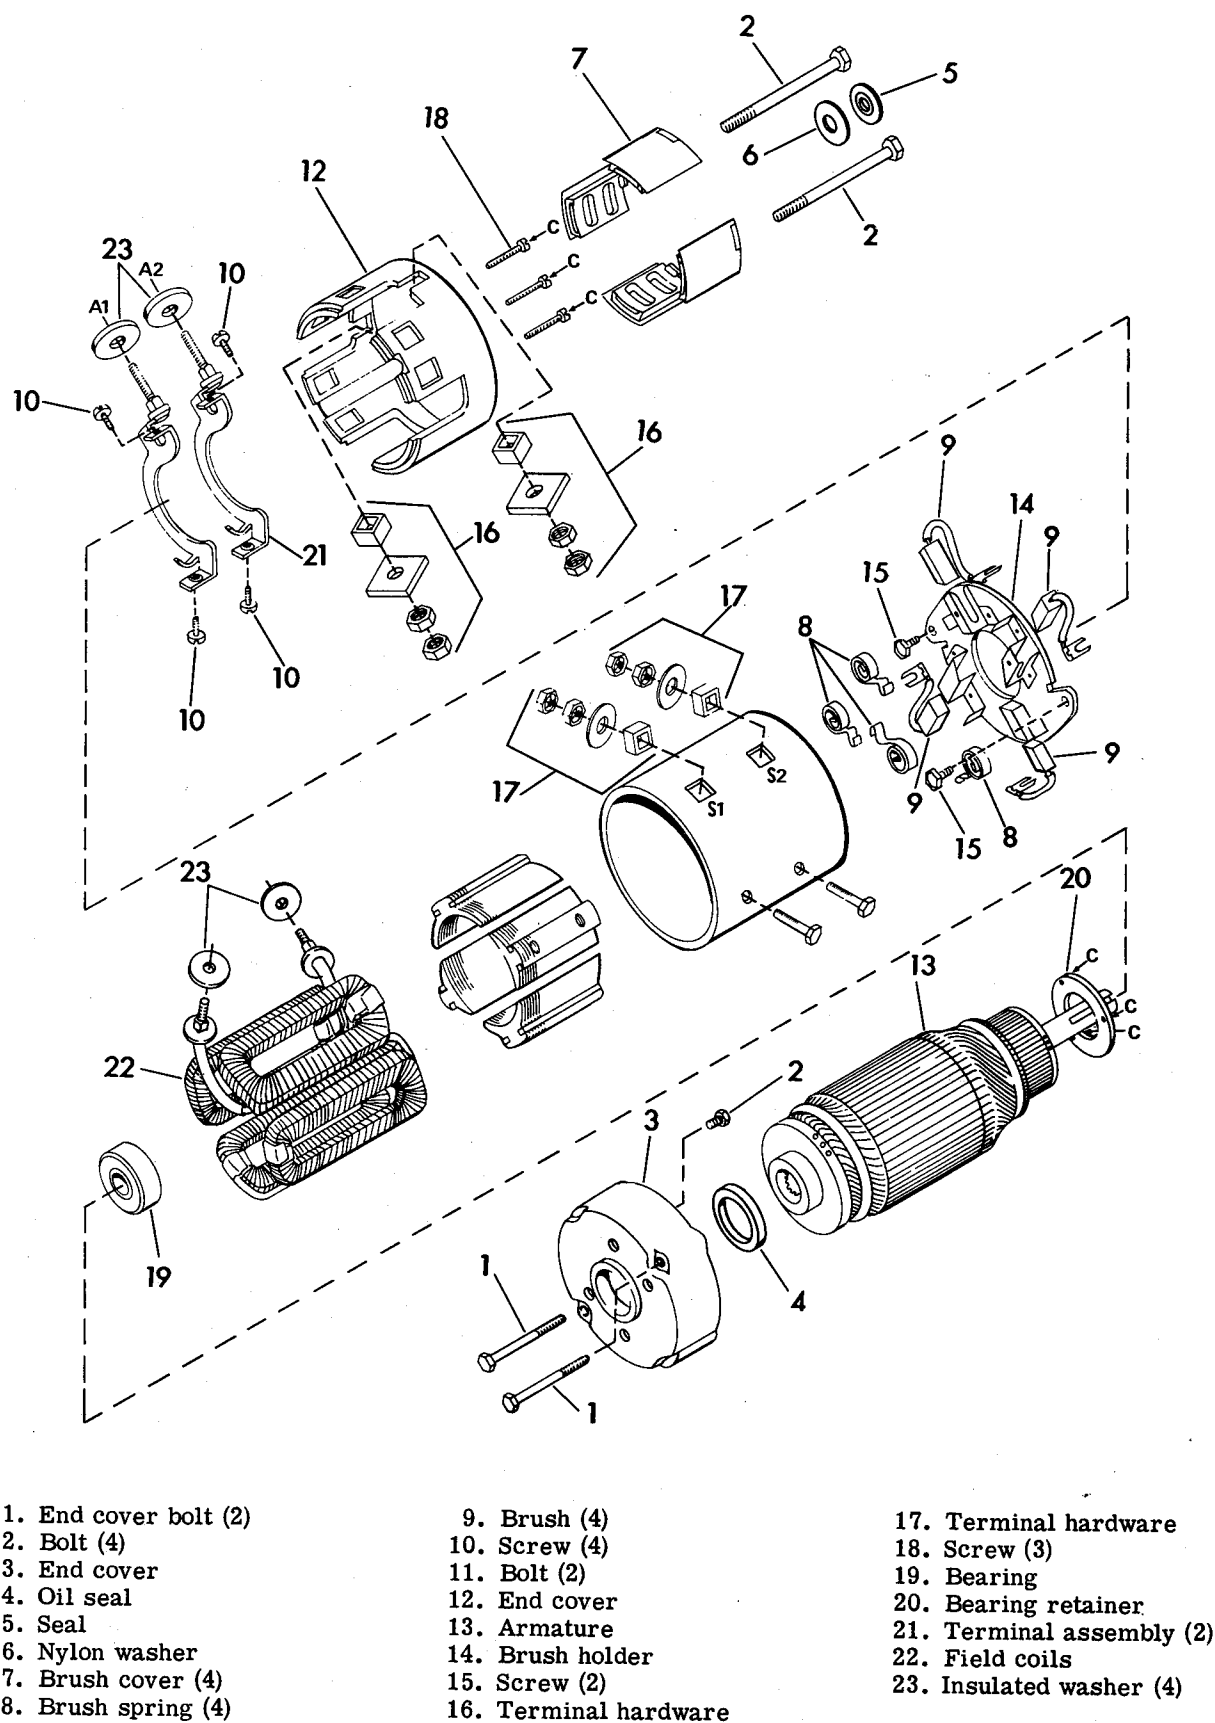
G.E. Traction Motor - 1975 and Later DE, DE-3, DE-4 - Exploded View
